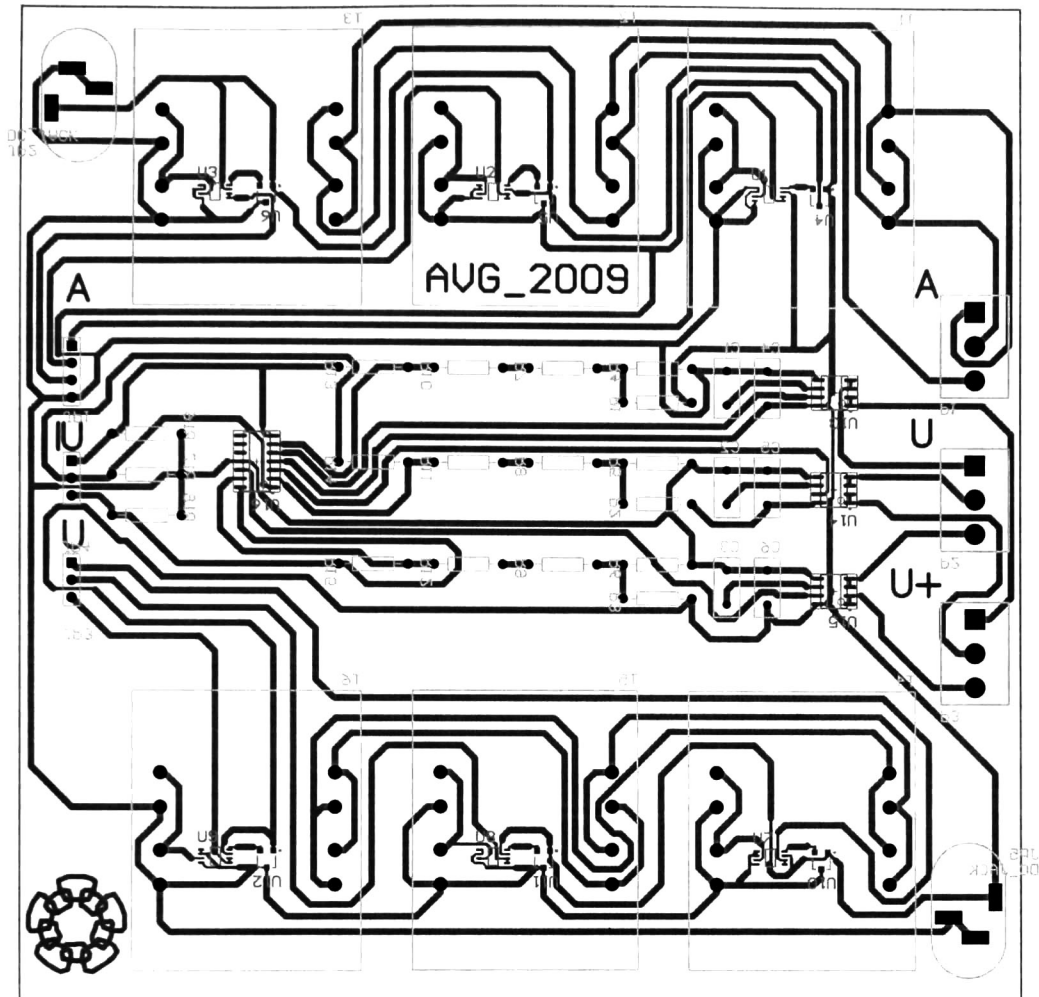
Signal Conditioner Printed Circuit Board view from Bottom Side
